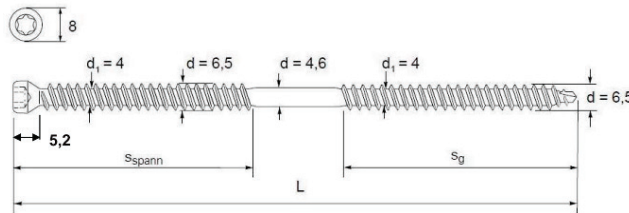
SFS Intec WT-T screw geometry with diameter 6.5 mm, (dimensions in mm), (source ETA-12/0063 SFS Intec (2012))
